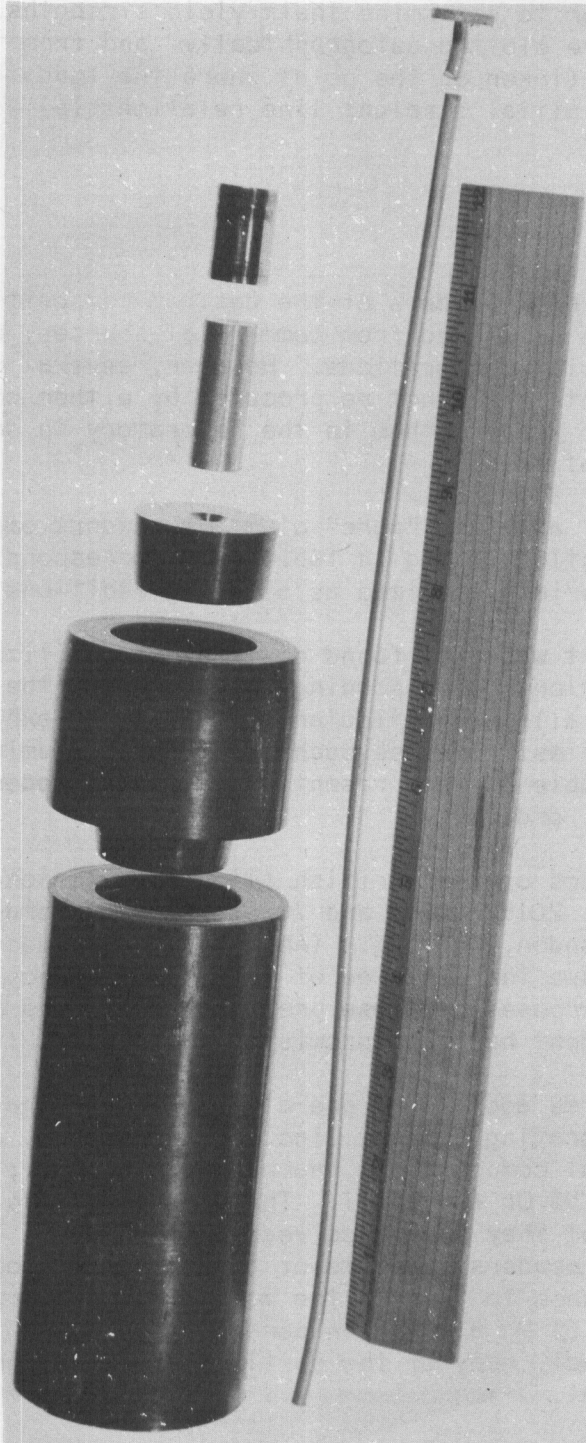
Exploded view of extrusion tools. A typical extruded specimen with sheared discard butt is shown just above the ruler.
